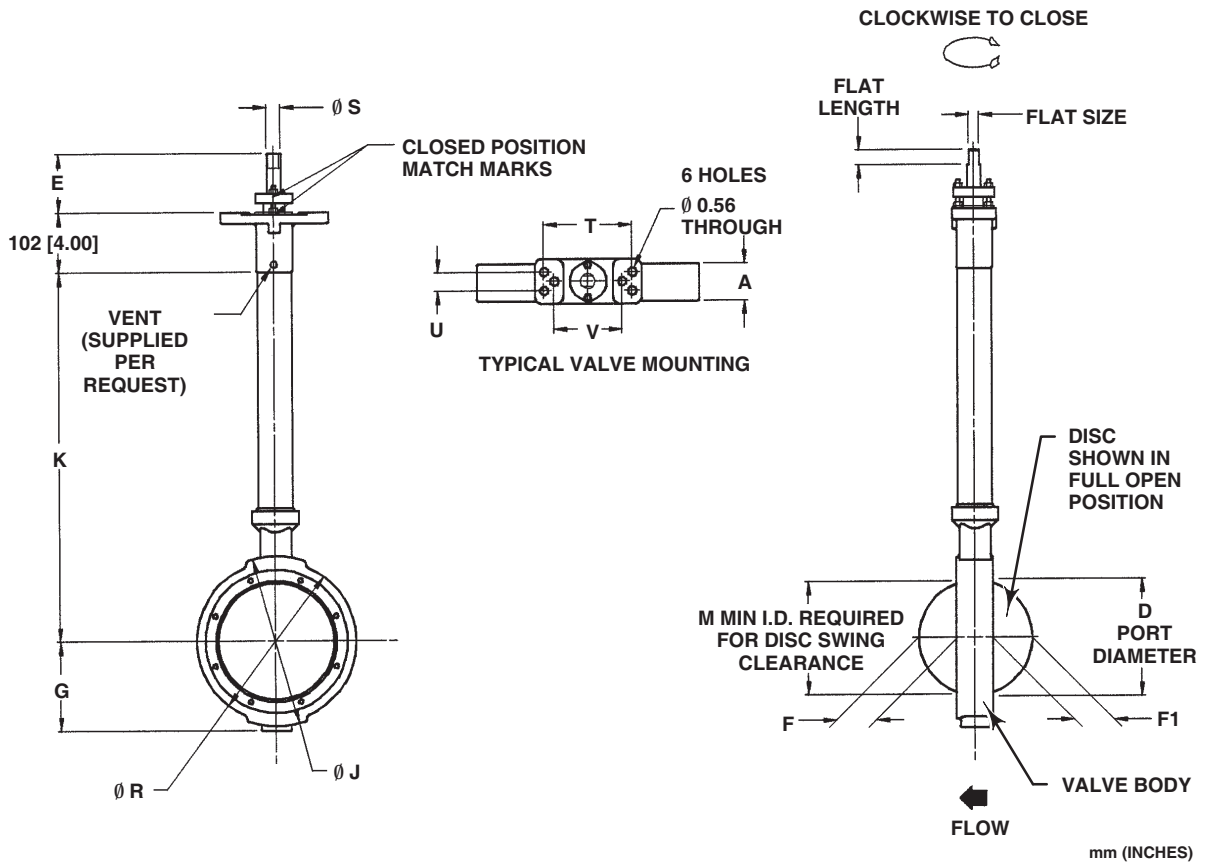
Dimensions, Wafer Style Valves, CL150, NPS 3 through 8 (also see table 3)
